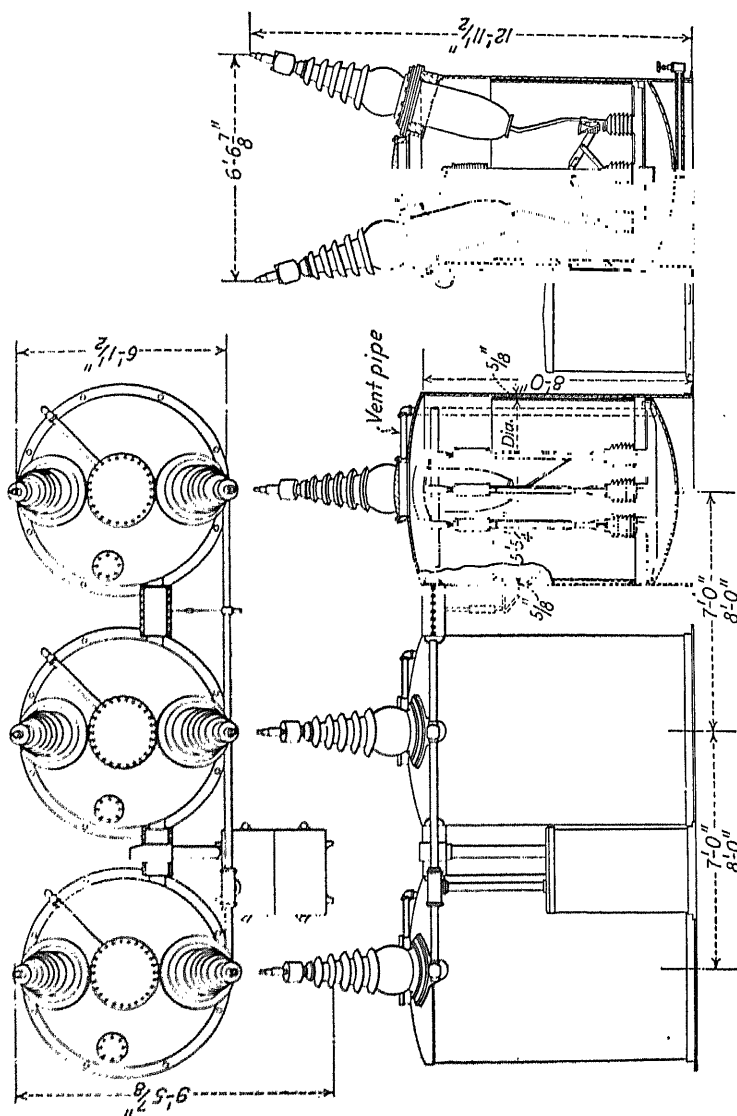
Kelman 3-D-6-A, 600-amp., 120-kv. oil circuit breaker, 500,000 kva.
